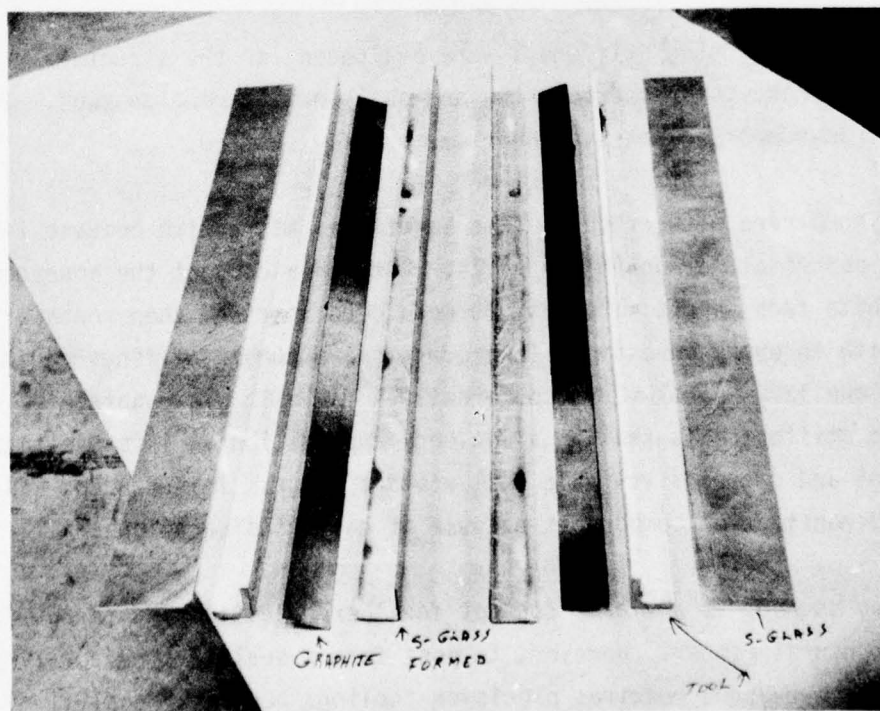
Thermoplastic Stringer Parts and Tooling Prior to Fusing
